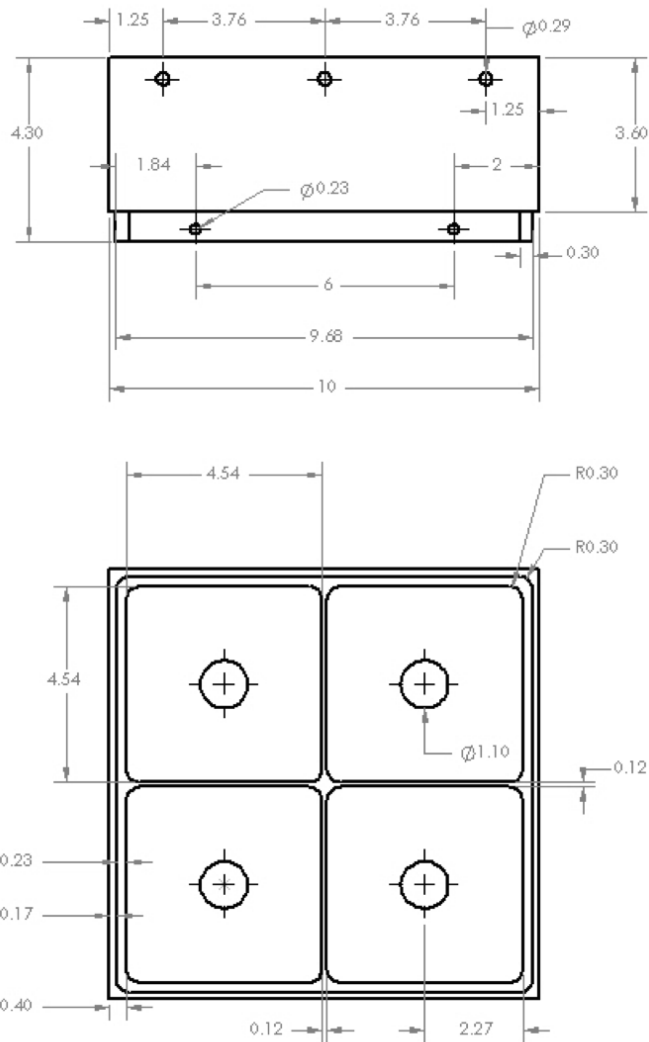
Dimensions (centimeters) of the GRID sensor head housing.
